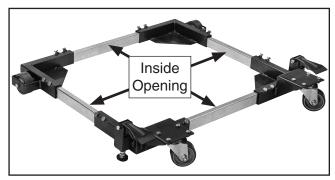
Properly assembled mobile base with inside opening slightly larger than machine base to ensure easy fit.
